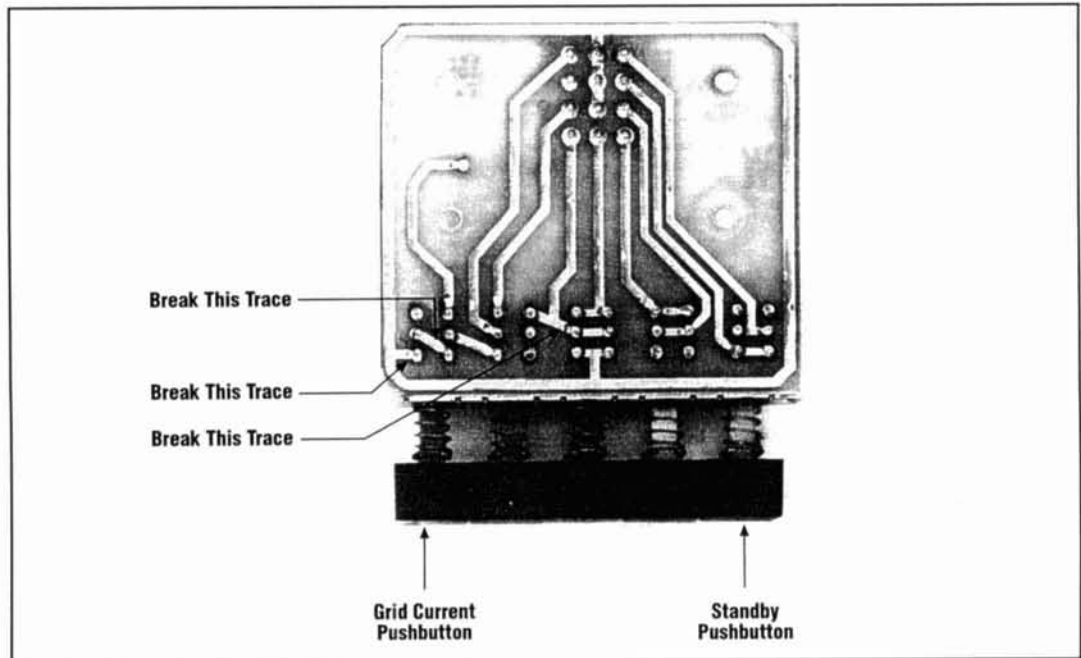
A. Unmodified PC-1003 bottom view of meter switching board.
